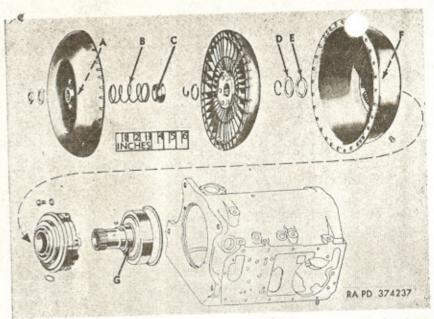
Repair and rebuild standard points of measurement for torus members and cover, and front oil pump drive gear.
